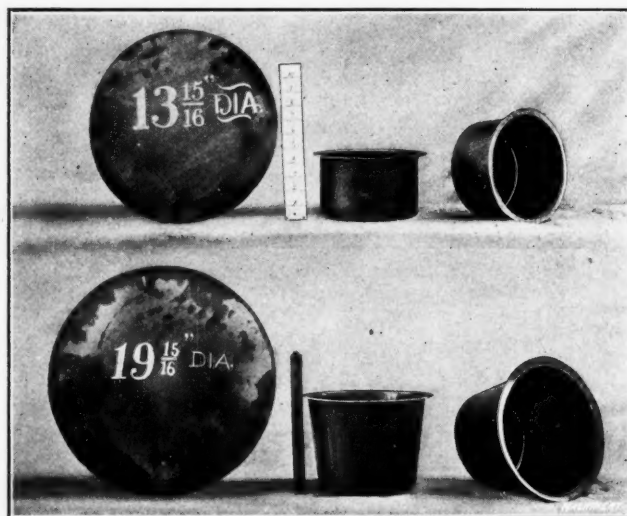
Blanks and Shells produced from Flat Blank in one Operation on Bliss Double-draw Press
